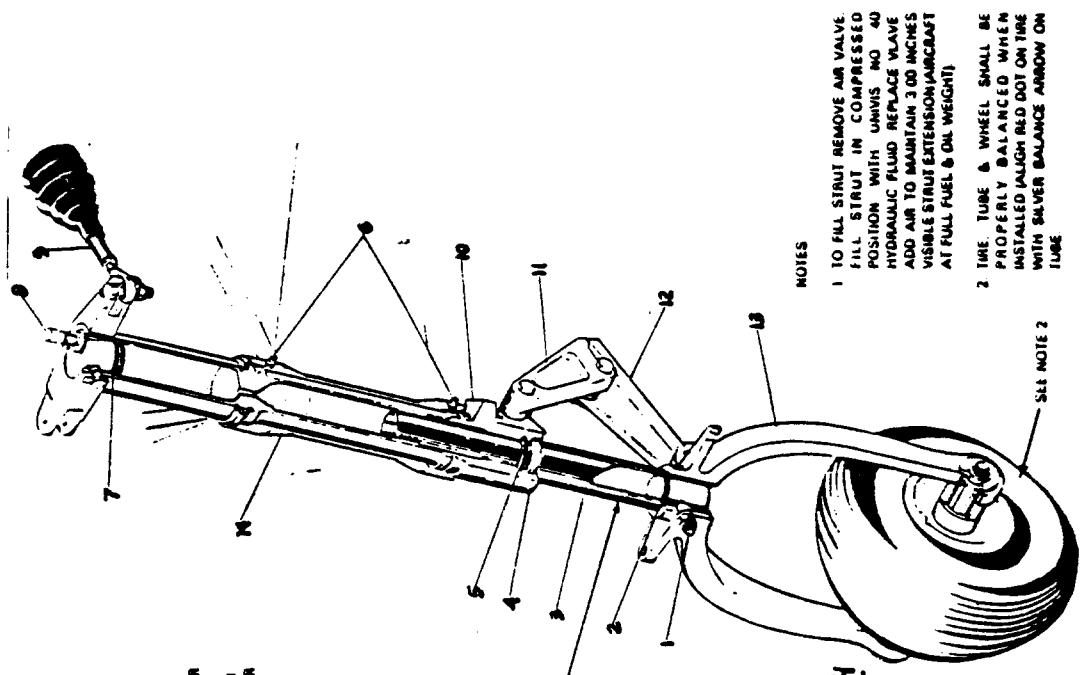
Fixed Main Gear Layout: Piper PA-38-112
